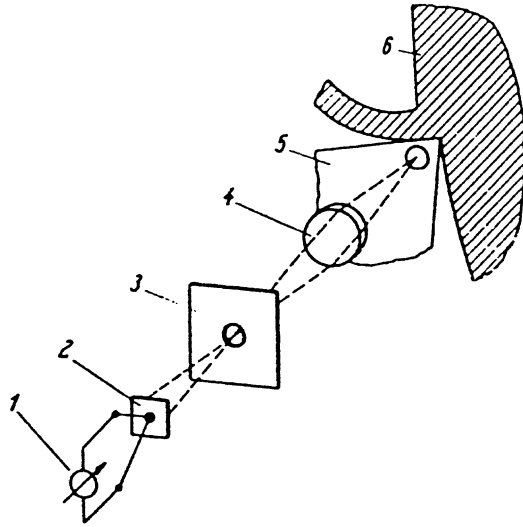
Schematic of the total-radiation pyrometer used for determining the temperature distribution on accessible surfaces of the tool and the workpiece using an optical condenser; after Schwerd [41]. 1. Galvanometer; 2. thermocouple; 3. Shutter; 4. Optical condenser; 5. Tool; 6. Workpiece.
